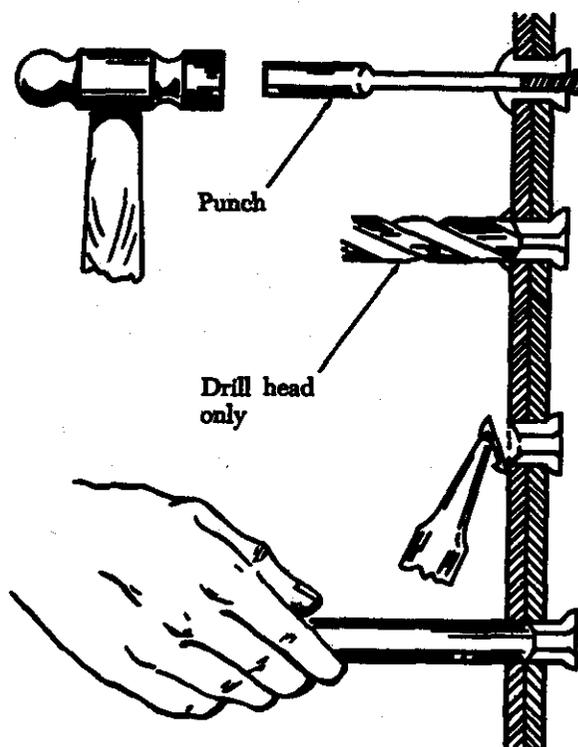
Removal of self-plugging (friction lock) rivets.
